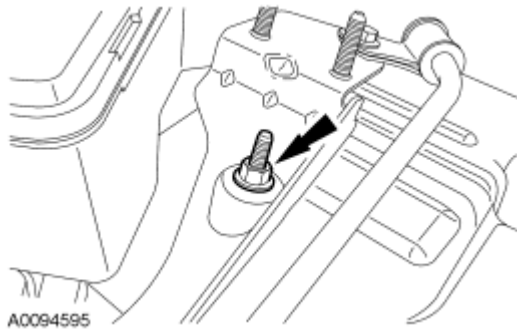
Locating Power Steering Fluid Reservoir Bracket Nut
